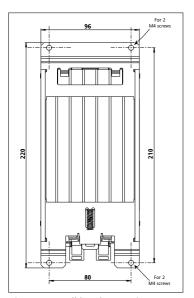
Bulkhead mounting - 16 A to 63 A units
